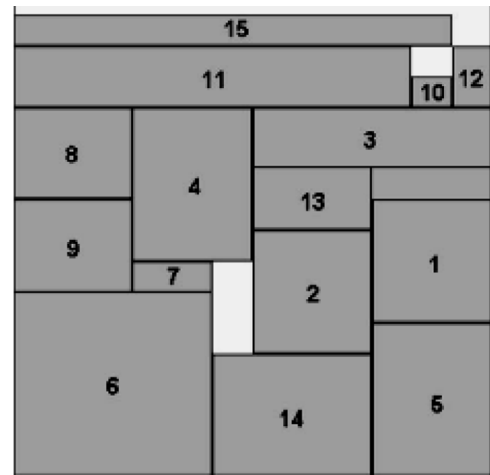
Nesting layout of regular shaped parts in regular sheets.
